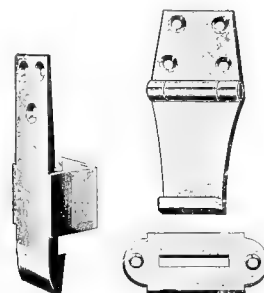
Table Leg Hook; Table Holder and Plate. Adams & Westlake Company.
